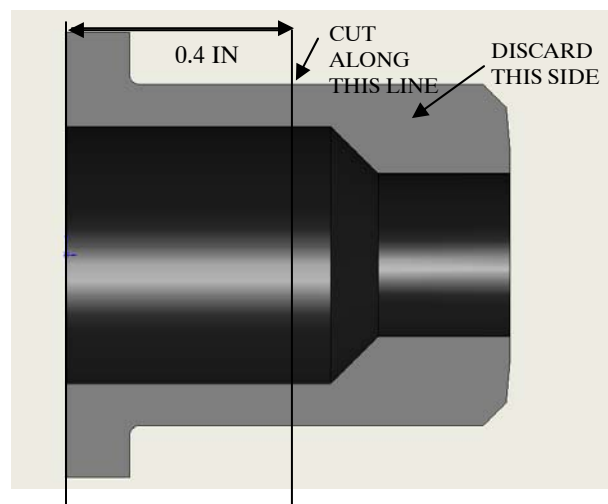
HP PLUG PIN SEAL CUTTING DIAGRAM
